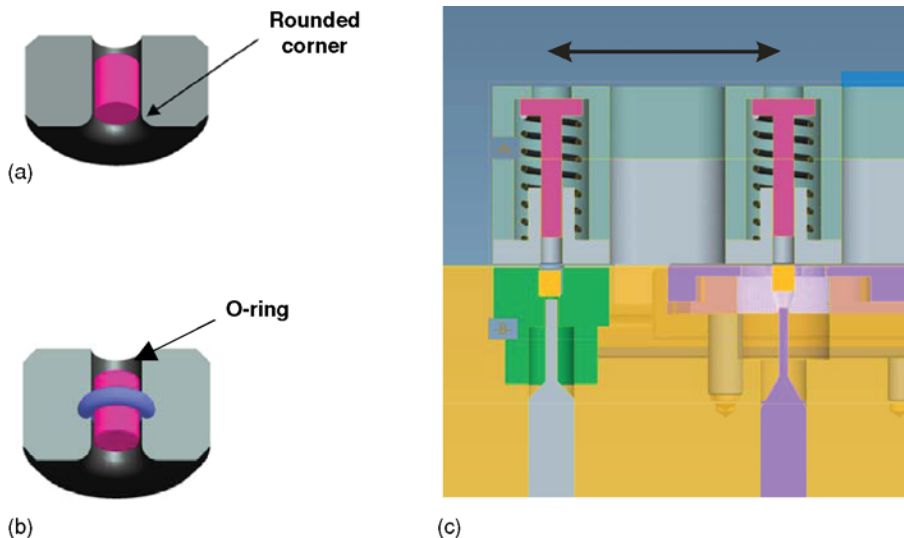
(a) Gripper for cylindrical micro-component functioning by a combination of friction and sticking forces. (b) Gripper with integrated rubber O-ring. The billet is centered in the carrier and is held in place by the friction of the O-ring. (c) Sectional drawing of a micro-bulk forming tool with an integrated ejector and transfer system.
